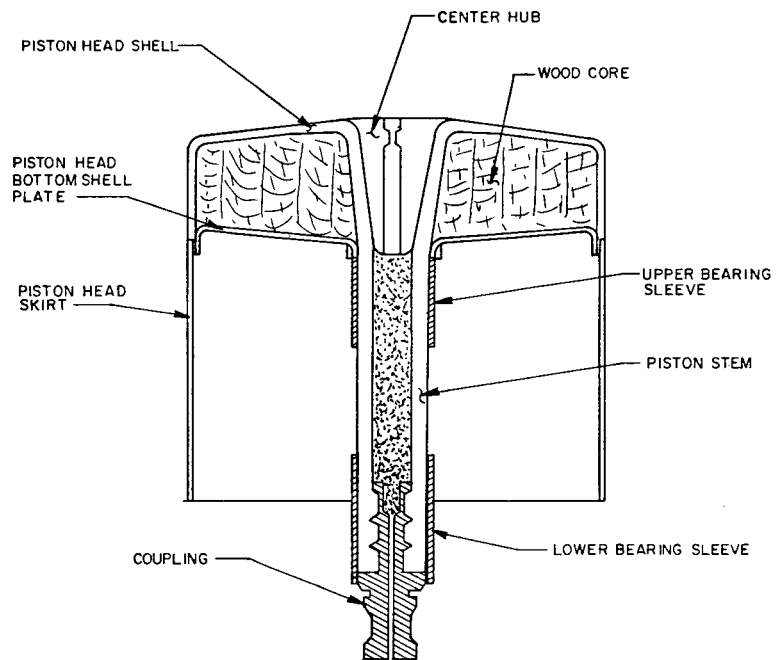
SCHEMATIC OF PISTON ASSEMBLY
